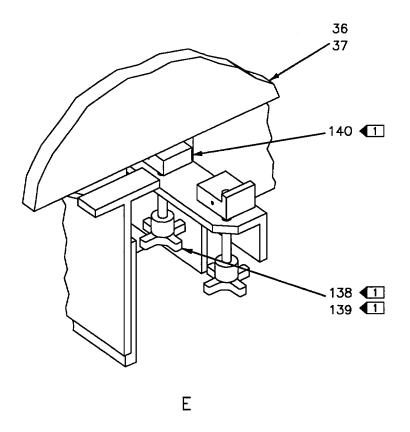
Installation of Drill Plates into Maintenance Fixture (Sheet 3)
